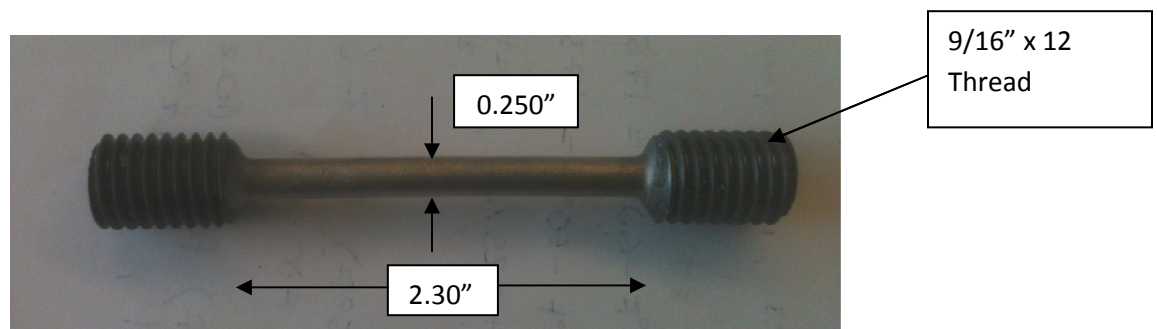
Photograph of one of the many round tensile bars machined from the Ti-6Al-4V forgings.
